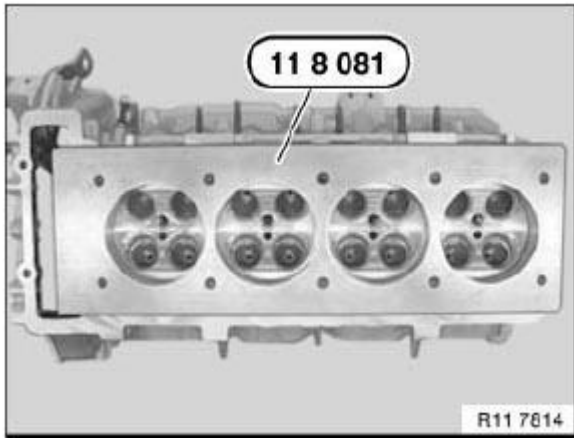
Identifying Special Tool 11 8 081 On Cylinder Head
